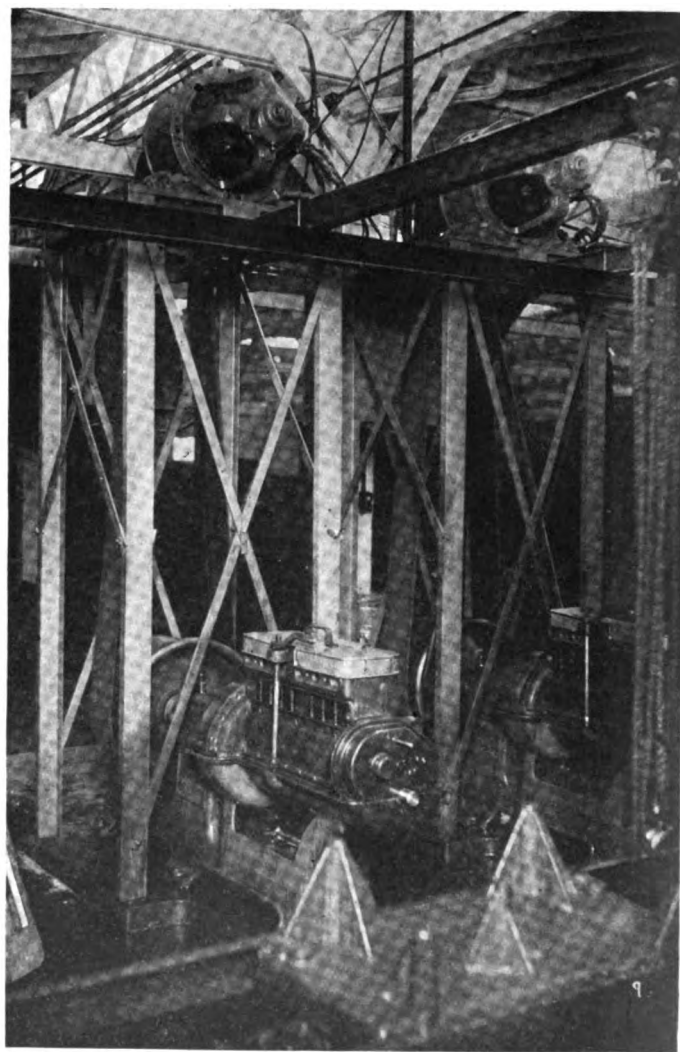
Belting-in motor with sheet metal top and base formed like oil pan on belting-in machine. There are twelve of these machines to take care of the production
